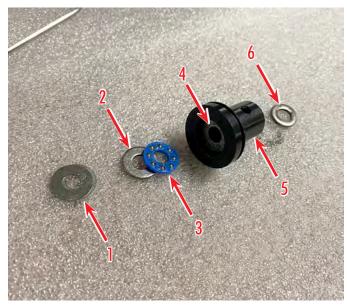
(1) Shim washers, (2) top thrust bearing washer, (3) thrust bearing, (4) bottom thrust bearing washer (still in the leadscrew support), (5) column thrust, and (6) 1/4" washer.
